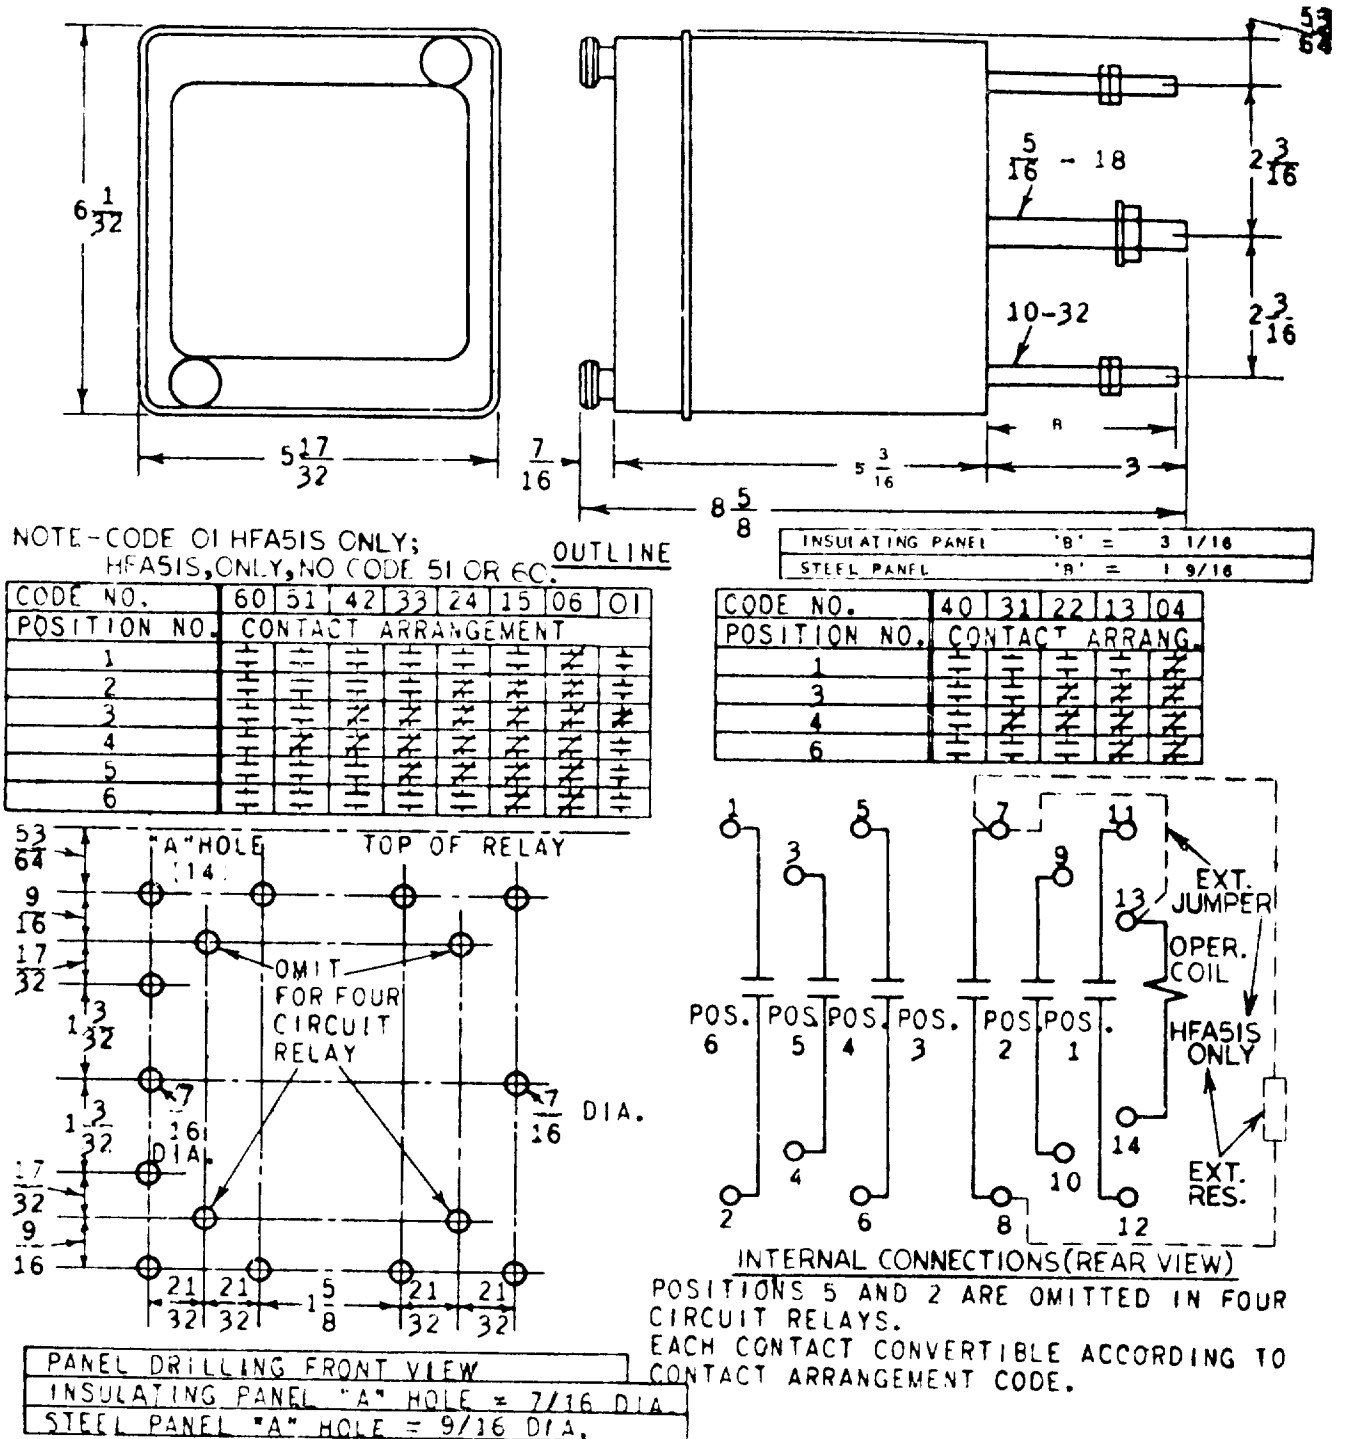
(K-6178931-12) Outline and Panel Drilling for Surface-mounted Type HFA151 Relay
